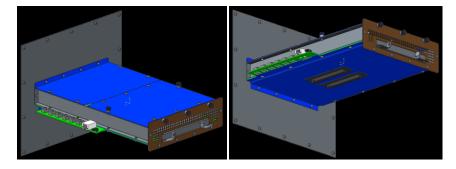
</u>114: SFF Card Thermal Test Fixture PCB
